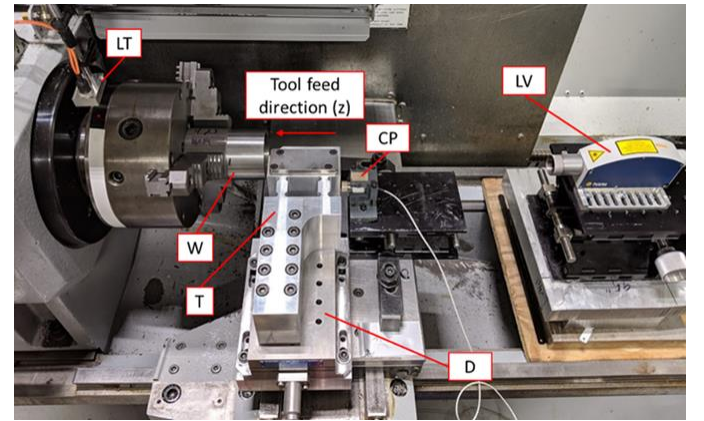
Photograph of tube turning setup including workpiece (W), dynamometer (D), flexure-based cutting tool (T), laser tachometer (LT), laser vibrometer (LV), and capacitance probe (CP).
